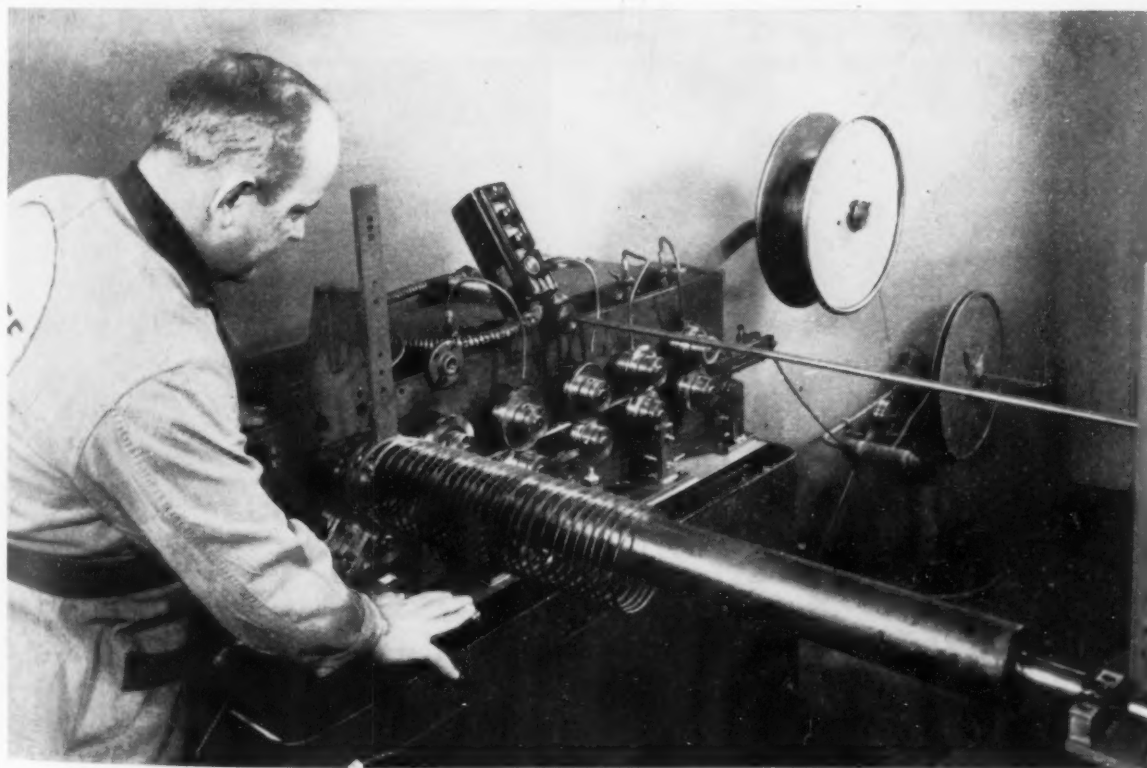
Labyrinth seals are formed continuously on this standard machine with special tooling. Strip and wire,
